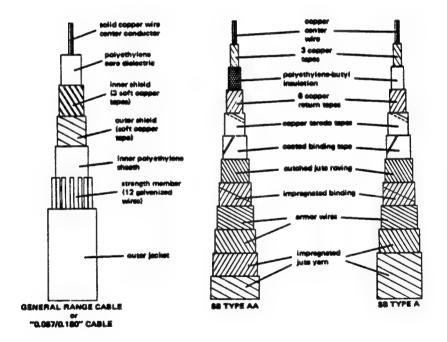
Typical Coaxial Cables (NAVFAC P-990 1978).
